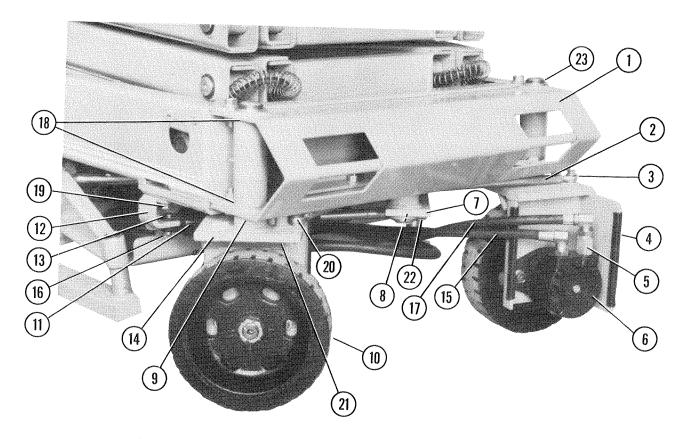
Front Drive Assembly, 2-Wheel Drive PM (215, 219)
